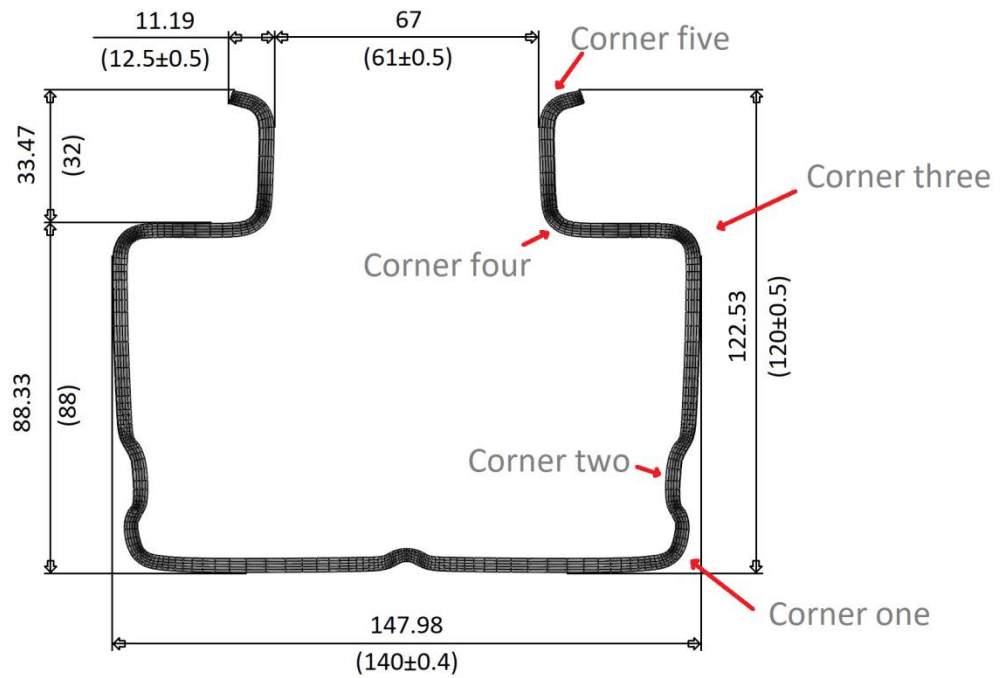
Dimensions of section after cyclic bending with manufacturer tolerances in parenthesis [1]; all values in millimeters
